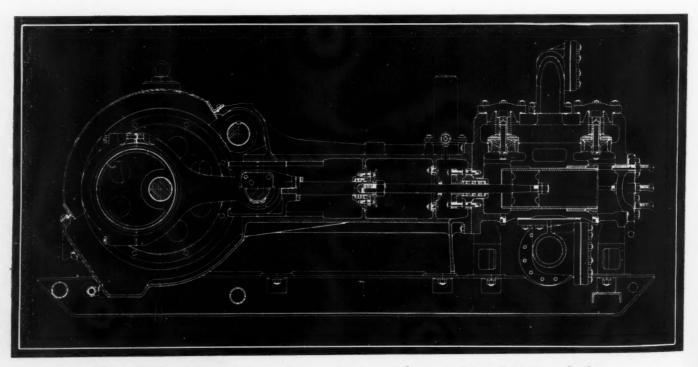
Sectional drawing of a mud pump showing crank, connecting rod, piston and valves
